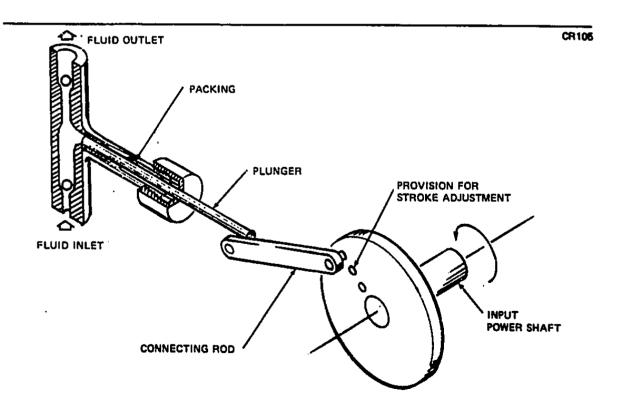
Packed Plunger Reciprocating Piston Pump
